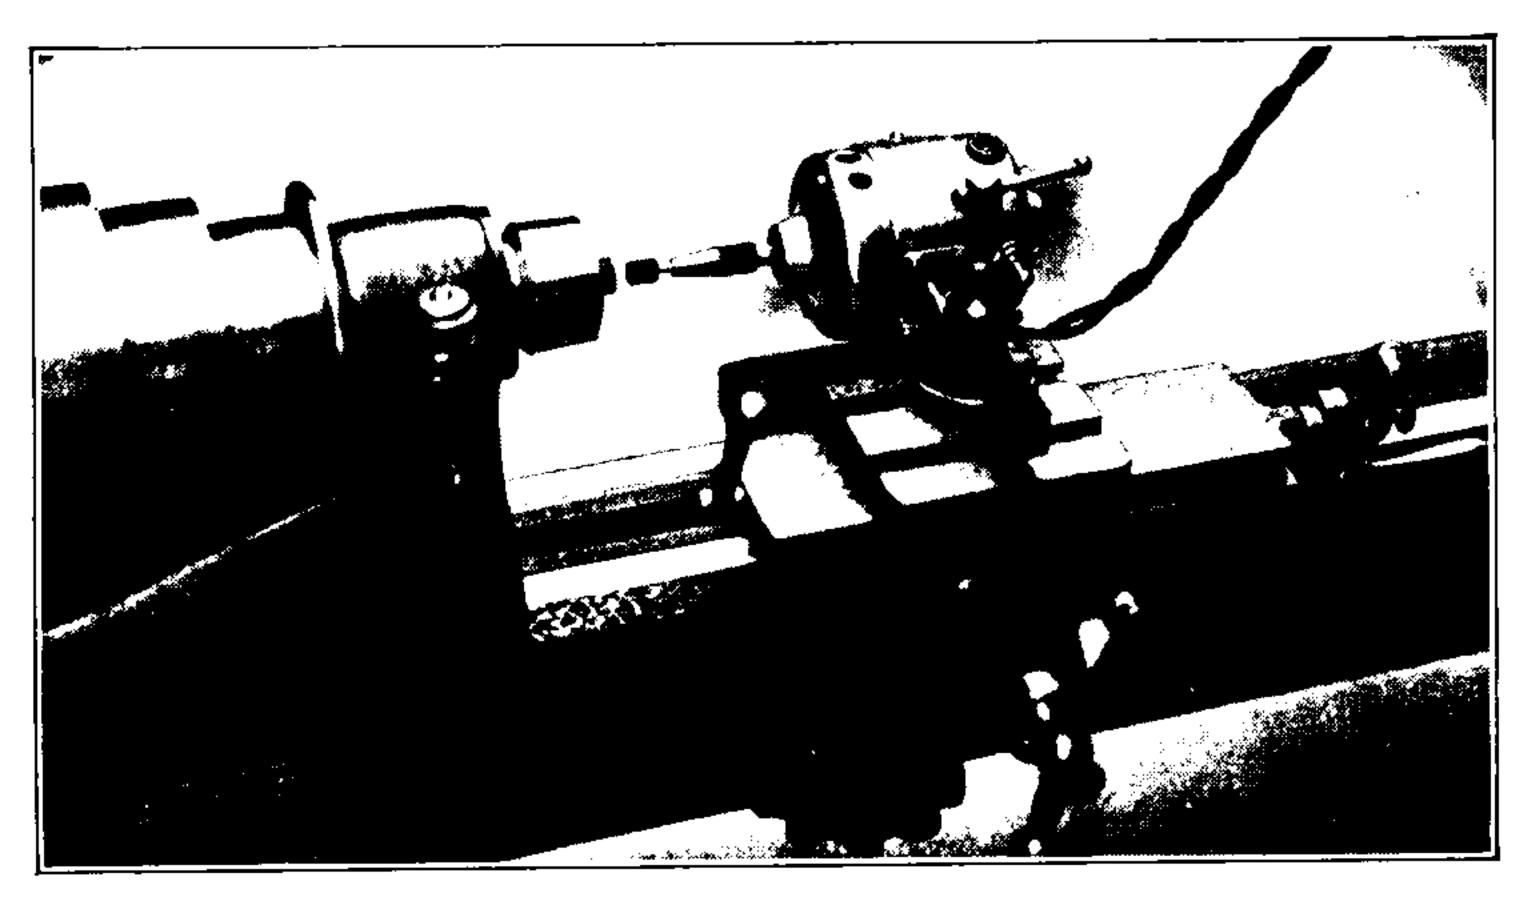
Electric Motor Slide Rest Grinding Attachment
